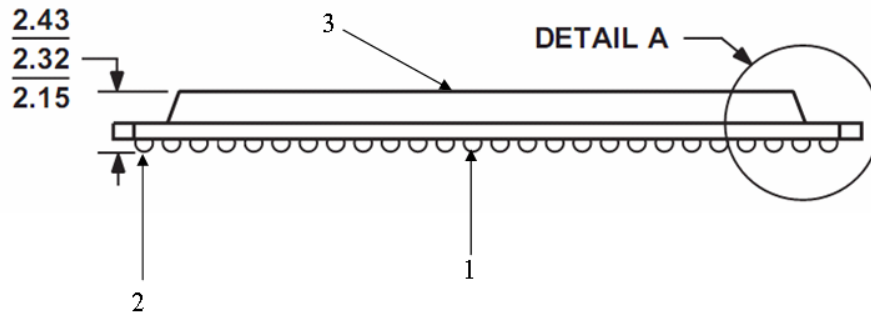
Cross section of BGA chip; 1, 2 and 3 – places, where the thermocouples are mounted.
